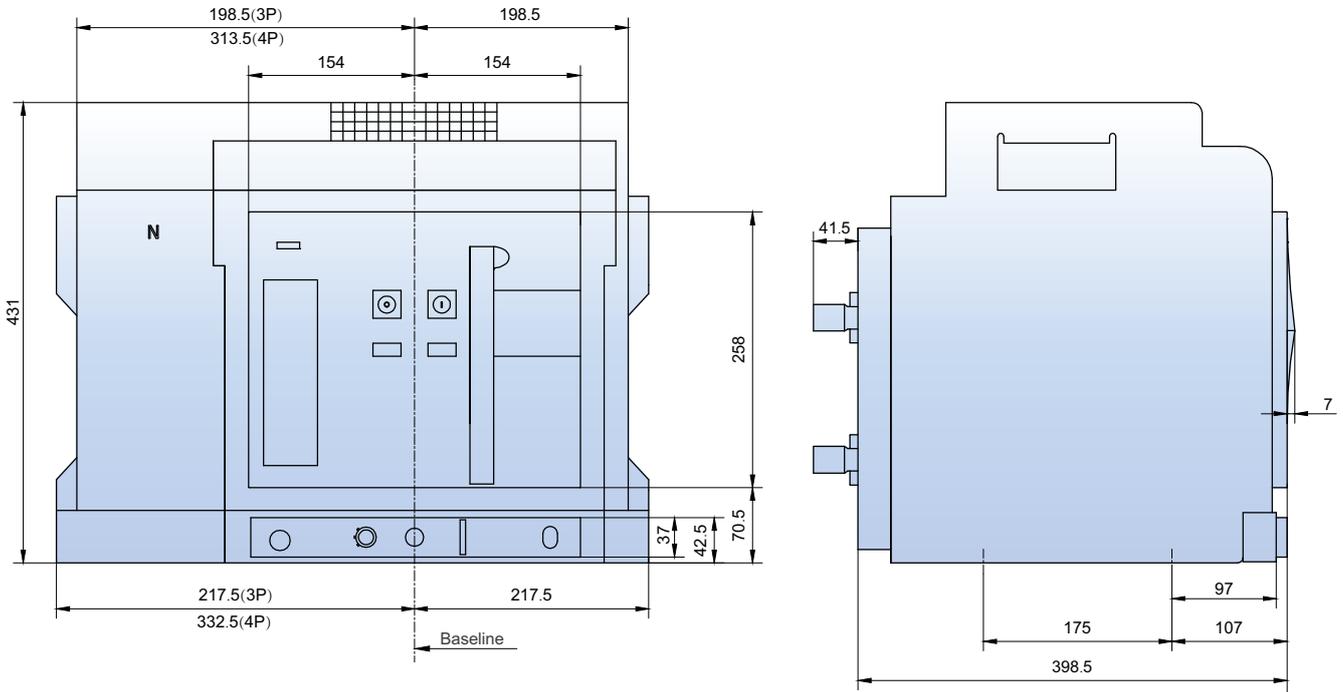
Overall dimension of NA8G-4000 withdrawable type
